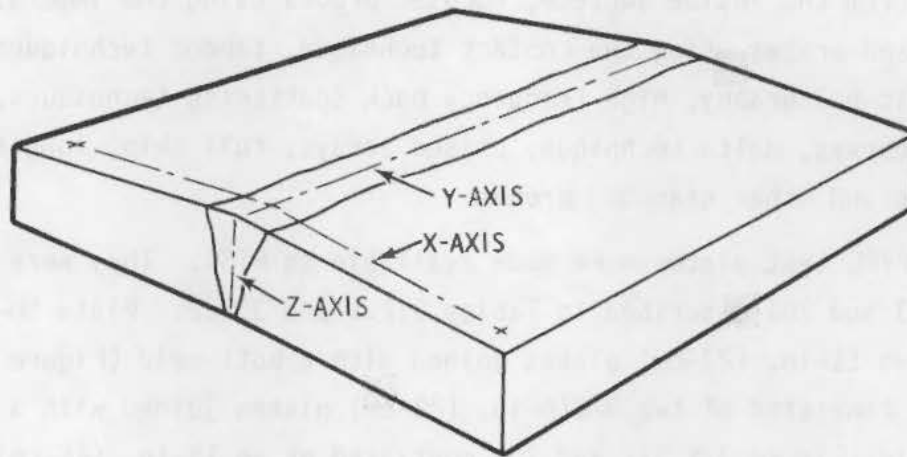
PVRC Weld Specimen 51-53
